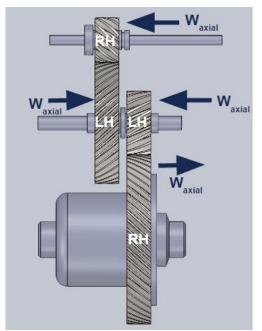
When operating in the forward direction, the axial loads from the gears will point towards the shoulders, providing enough support to constrain the shafts.
